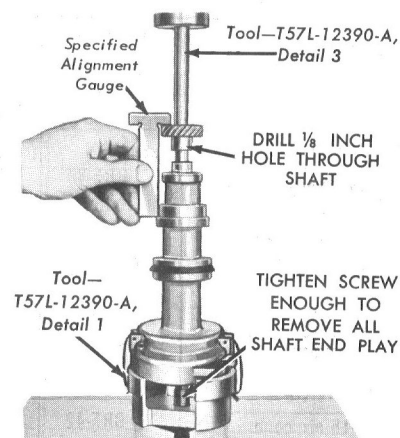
New Shaft and Gear Installation— V-8 Engine
